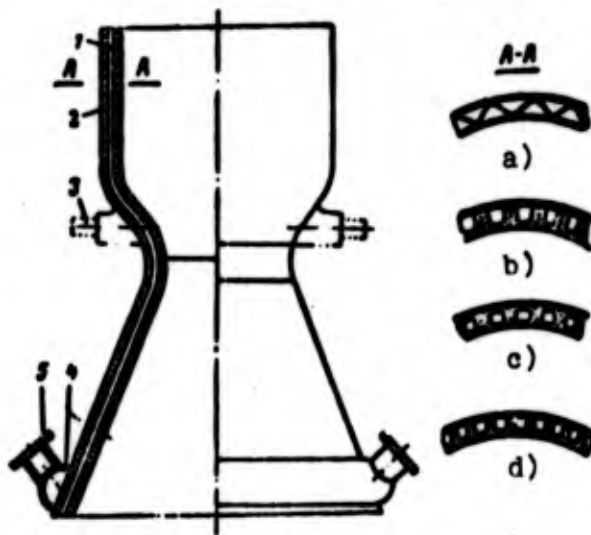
Construction of the central part of the KS. 1 - wall; 2 - jacket; 3 - journal; 4 - collector; 5 - branch pipe with flange.
